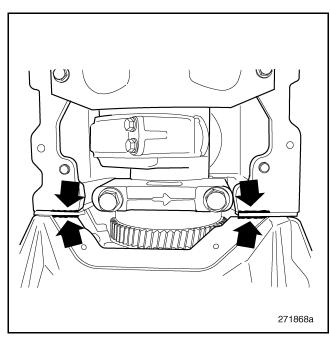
Sealant Points — Flywheel Housing to Timing Gear Plate and Plate to Block
